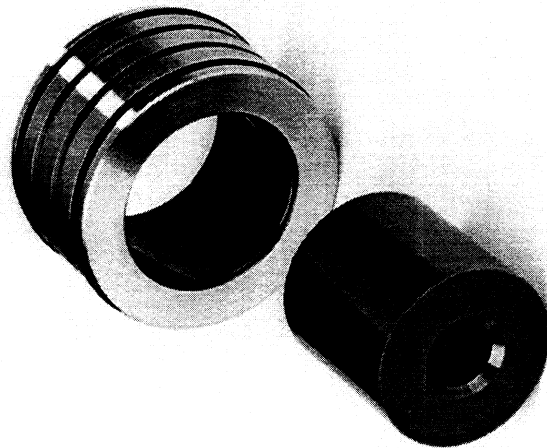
Test Bearing, Rotor and Sleeve Assembly
